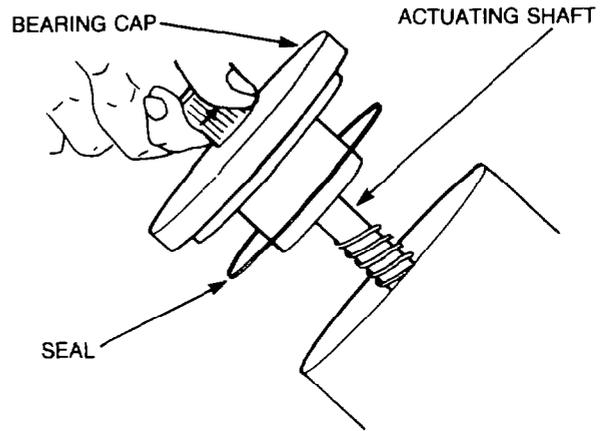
Bearing Cap and Actuating Shaft — Removal
